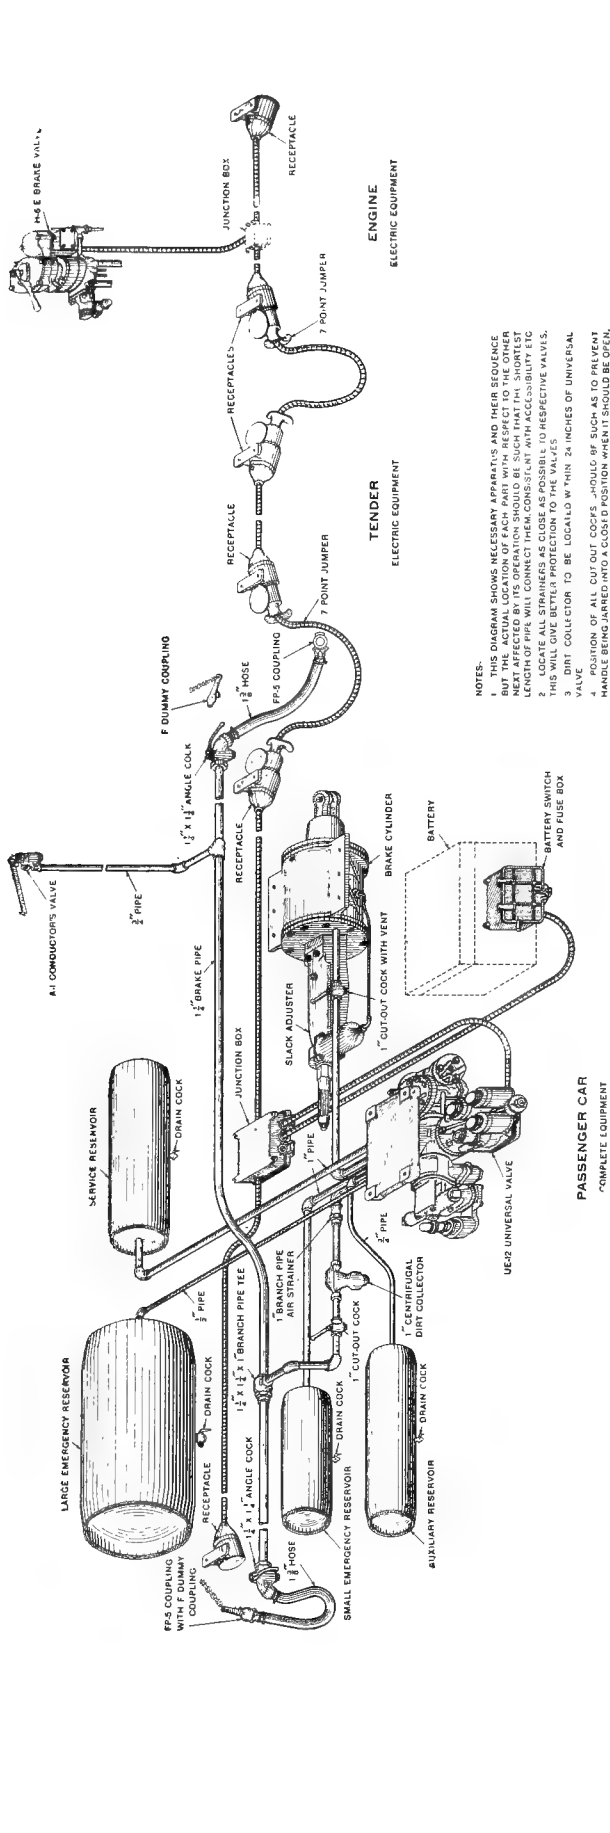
Piping Diagram of Westinghouse Universal Common Standard Electro-Pneumatic Brake Equipment, Schedule UCE, Complete for Engine, Tender and Car.
